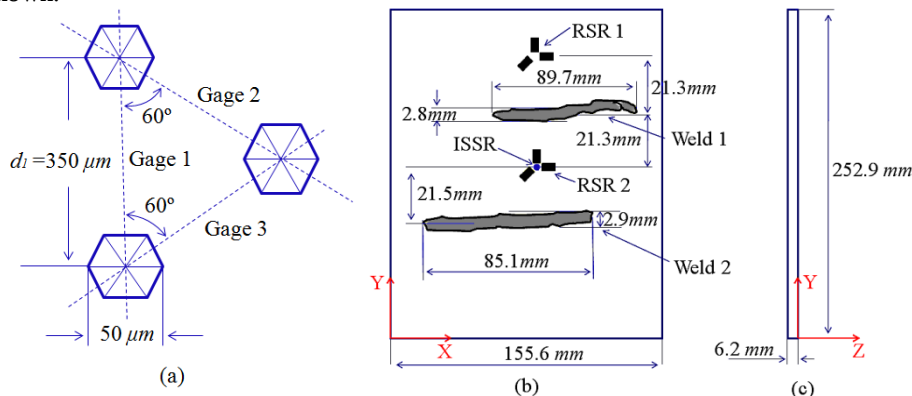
Schematic of (a) the ISSR, (b) top view of the test specimen, weld and ISSR, (c) side view of the test specimen
